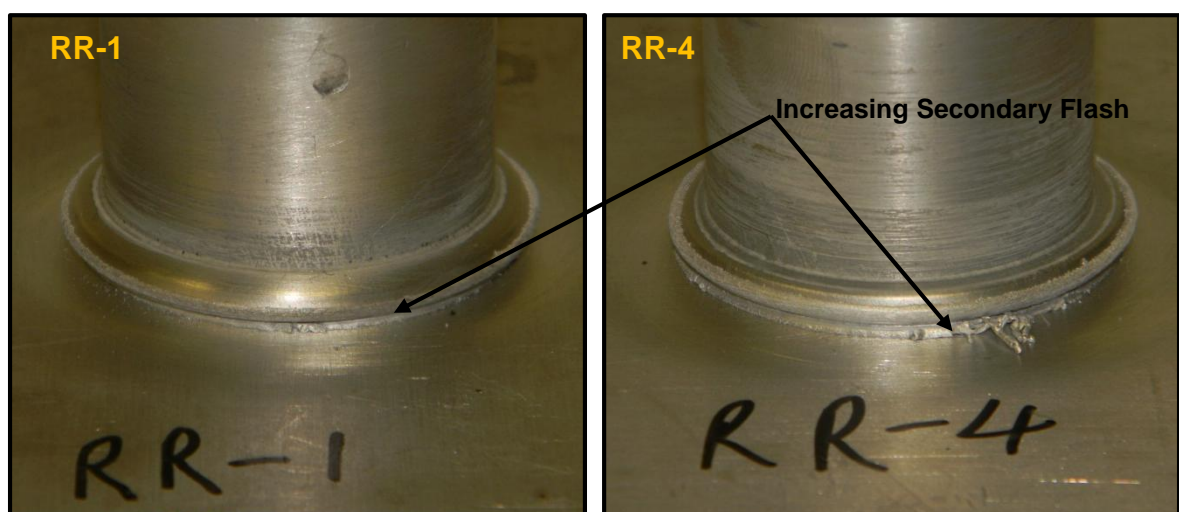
Flash Formation of Welds RR-1 to RR-4
